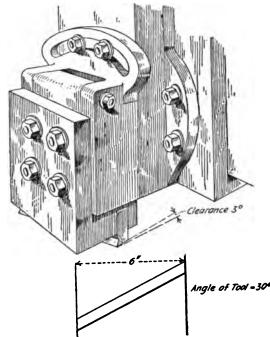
TOOL FOR A 6-IN. FINISHING CUT
